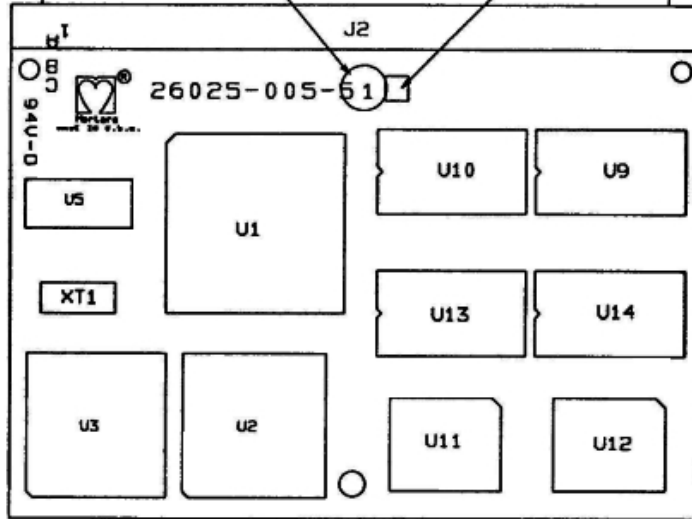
Processing Module (MPM) Printed Circuit Board
